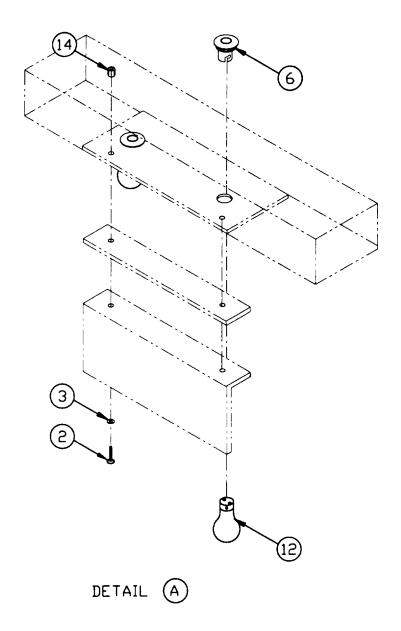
ELECTIRCAL ASSEMBLY (SHEET 2 OF 7)
